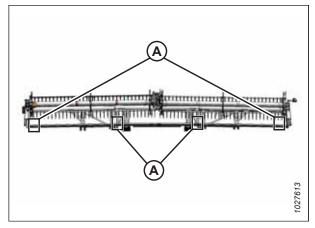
FlexDraper® Measurement Locations – Double Reel
